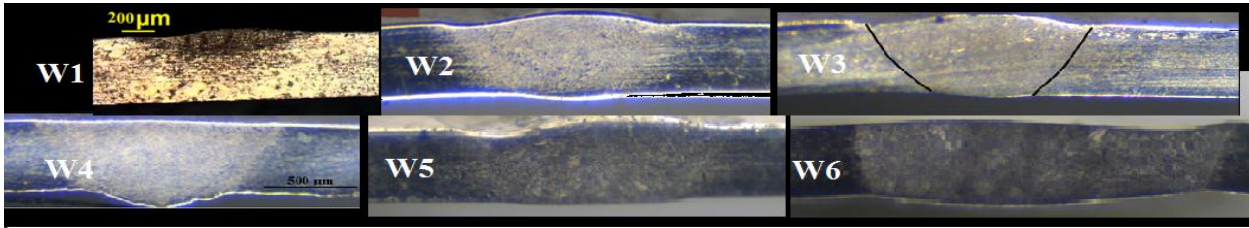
Weld macrographs corresponding to the welding conditions of Table 4.7.
